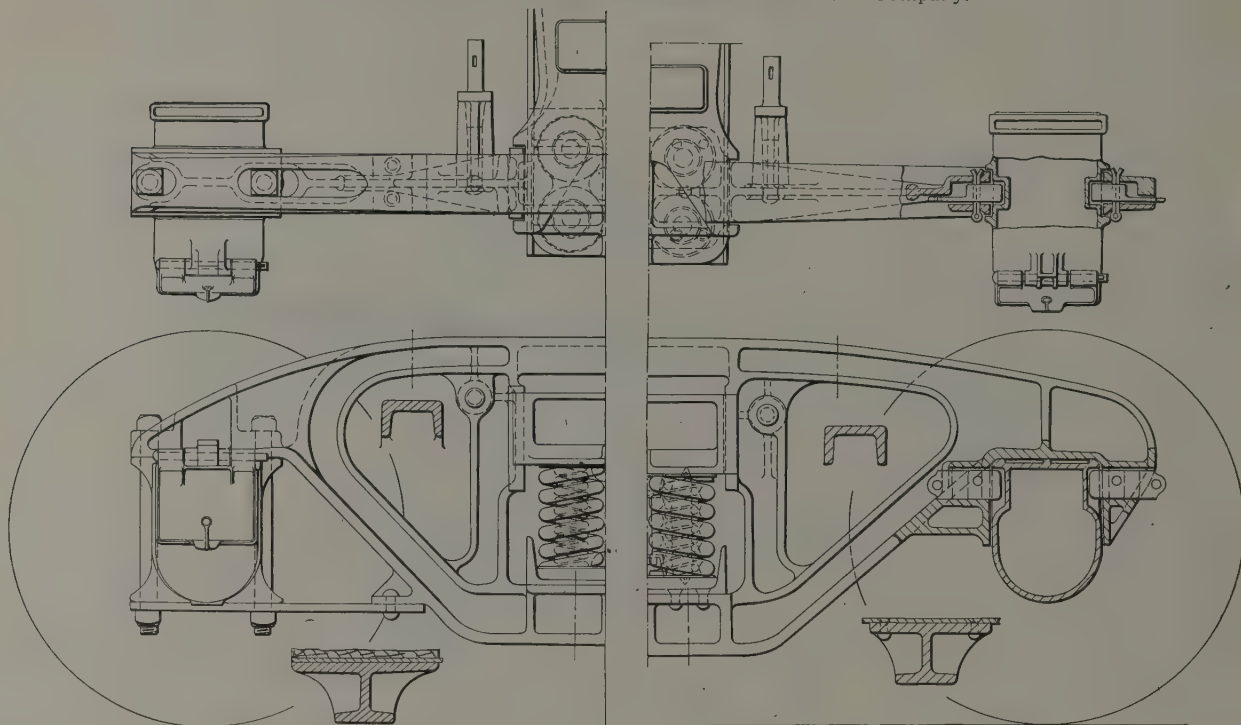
Gould Truck Frame, Z-Type Bolster and Journal Boxes for 50-Ton Capacity Cars. Gould Coupler Company.
